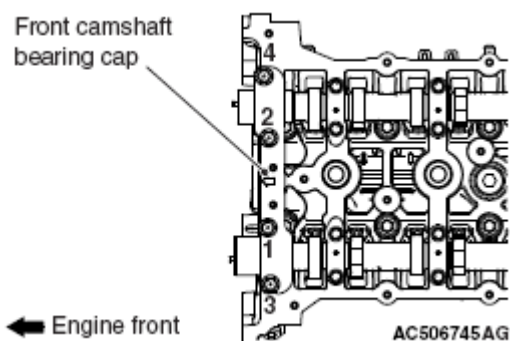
Identifying Front Camshaft Bearing Cap Mounting Bolts Loosening Sequence
